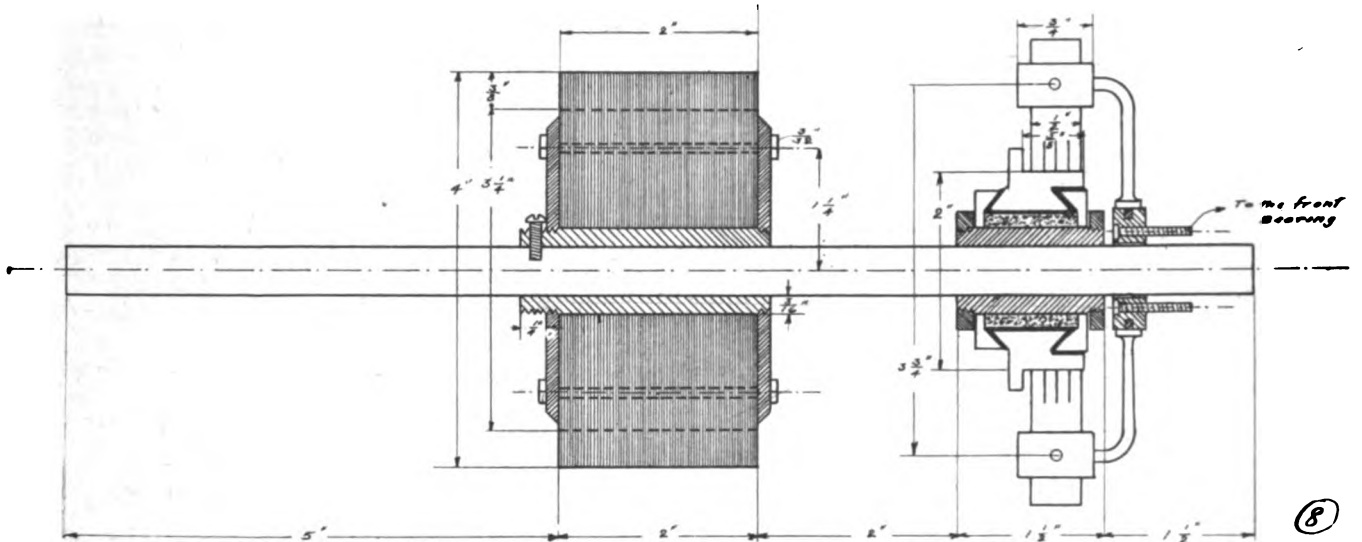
Cross-section of machine showing shaft, armature, and commutator.
